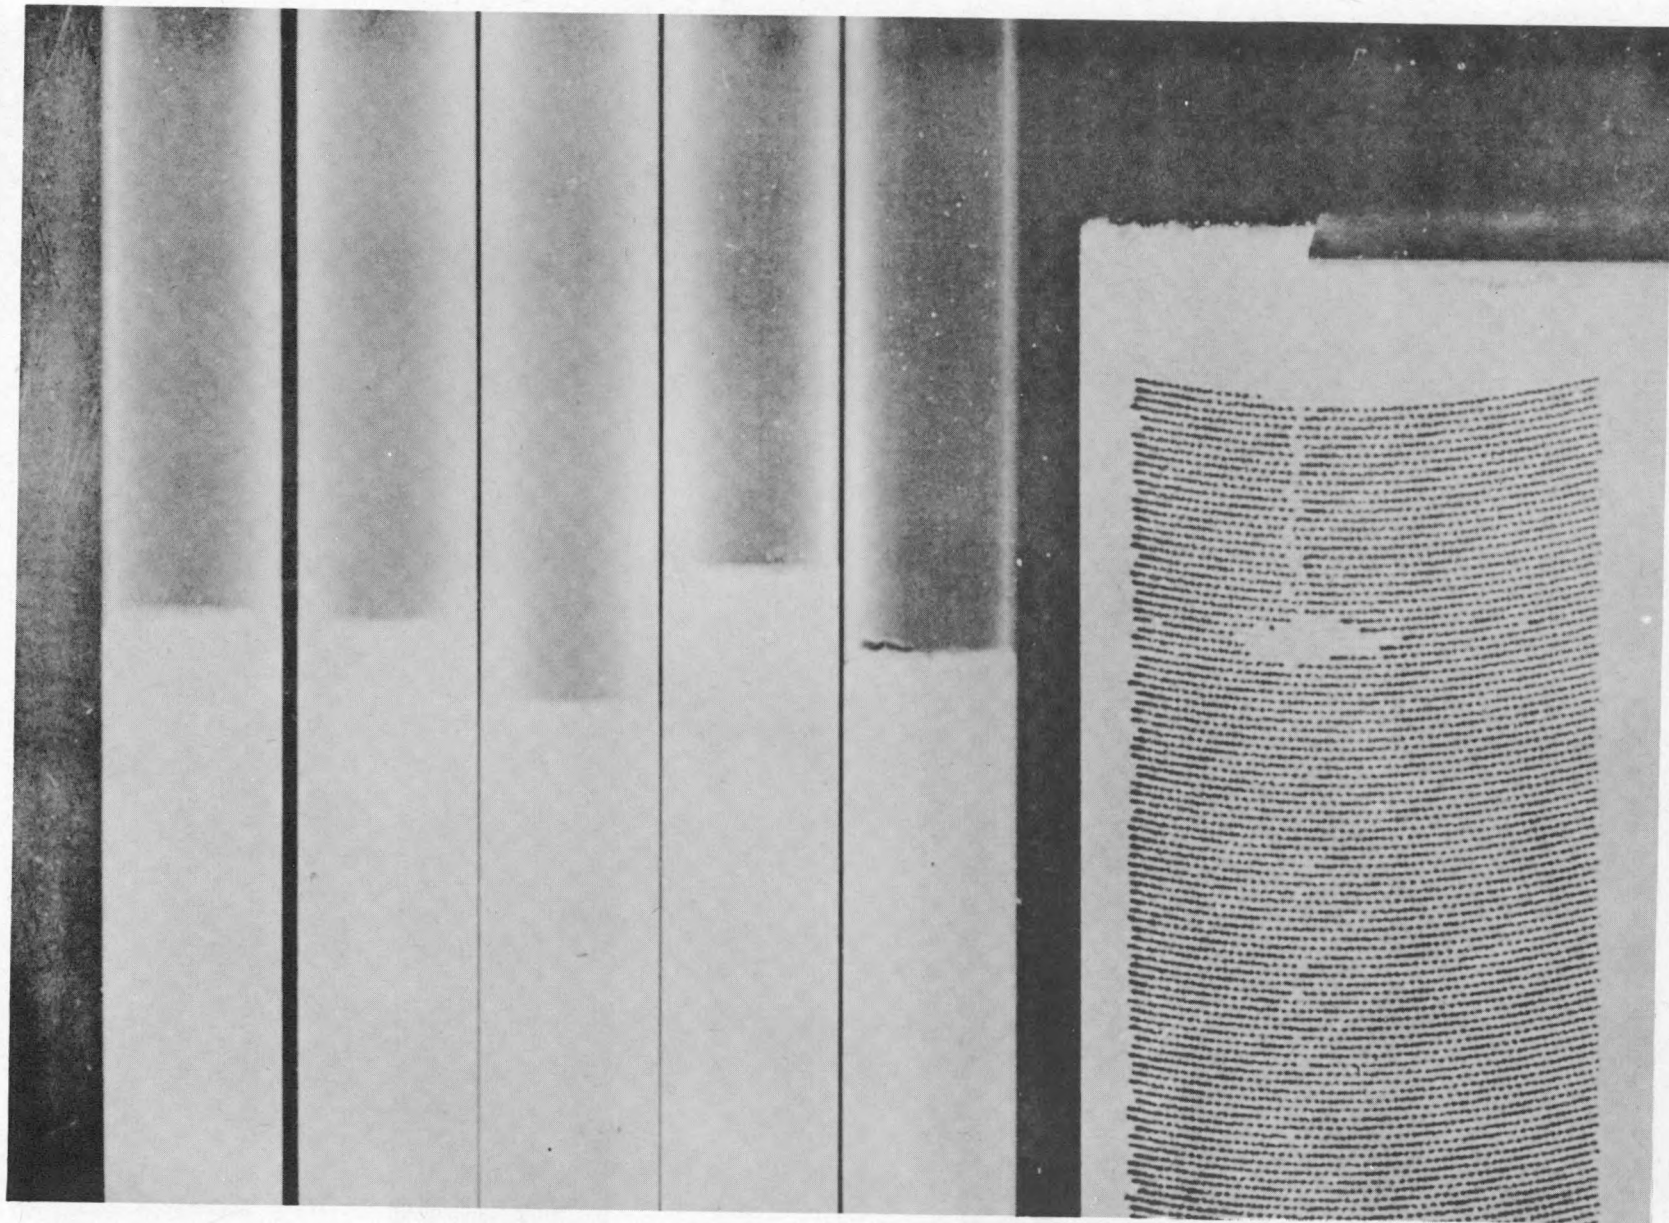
Fuel Element and DCP Recording Showing Cracked Dead End Weld
